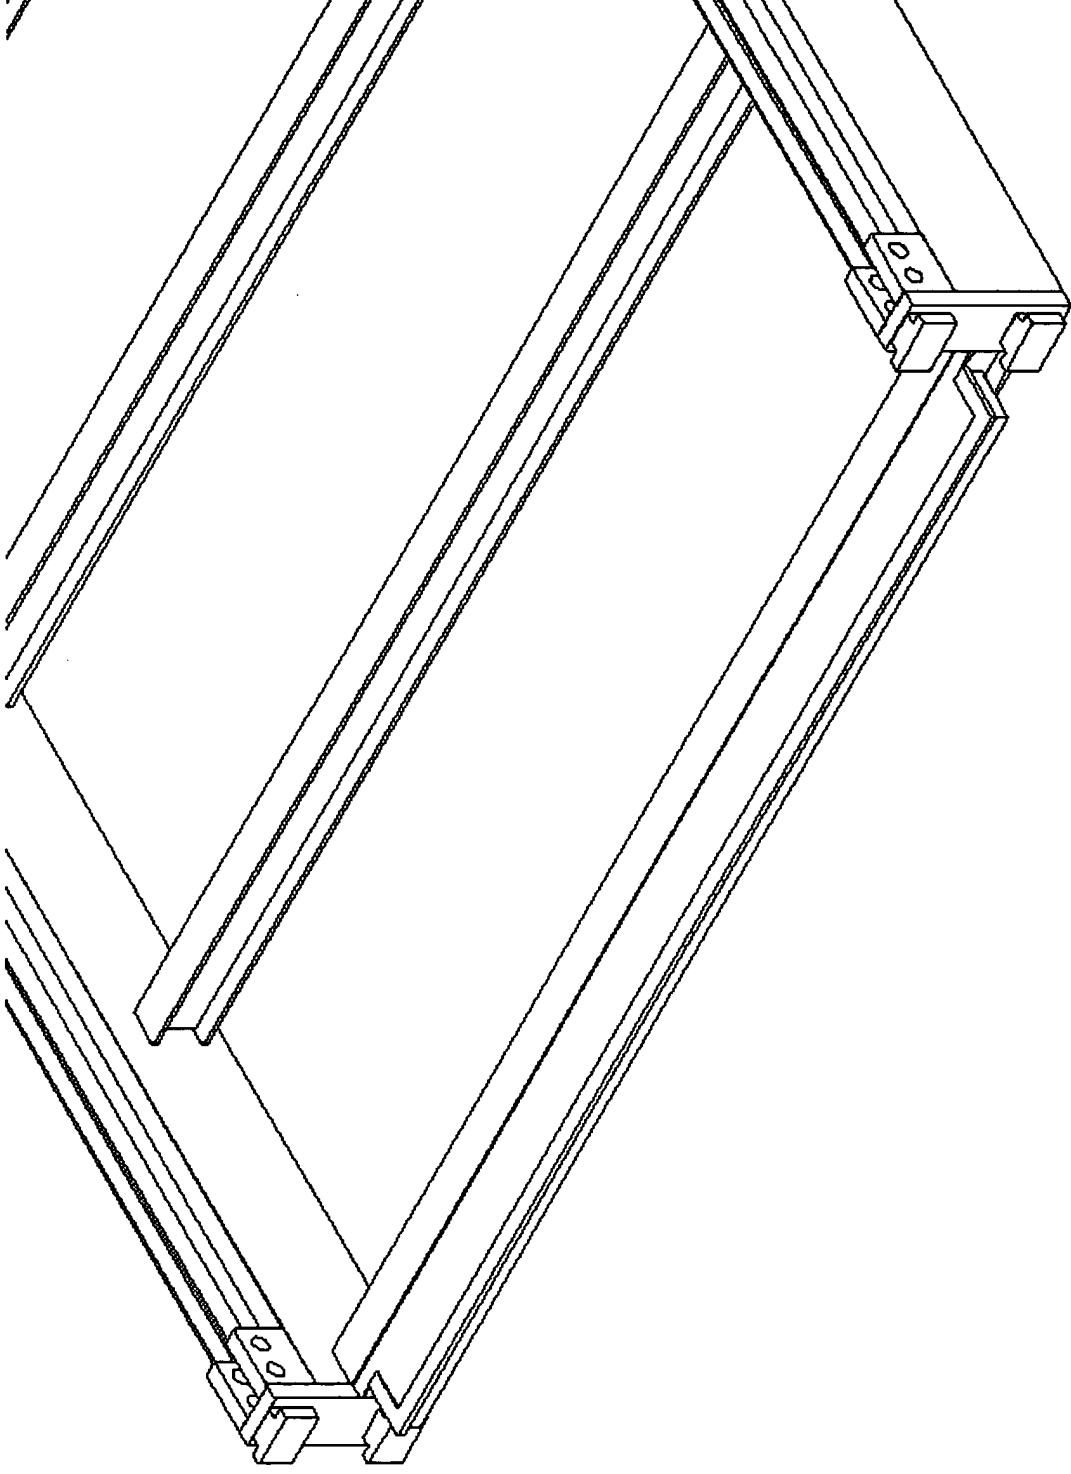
A: Isometric view of the right end of a floor frame (40 foot collapsible cargo container)
